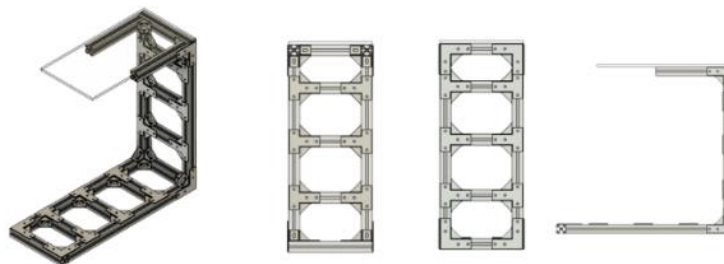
CAD design of the hand rest apparatus in isometric, front, back, and side views
